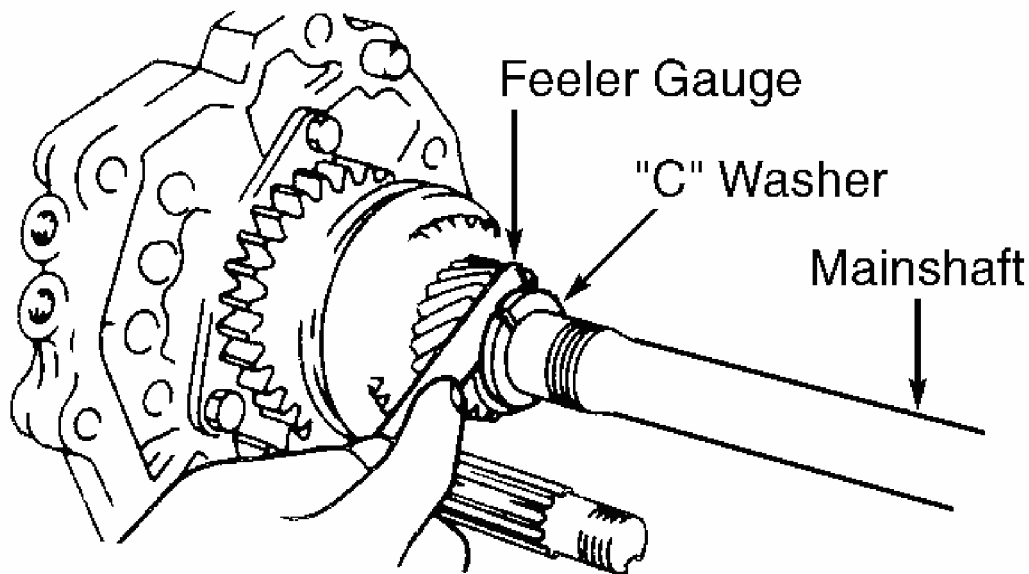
Checking Clearance Between "C" Washers & Thrust Lock Washer
